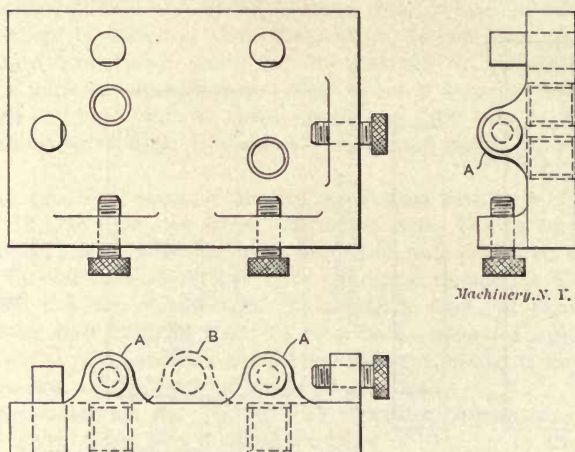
Second Improvement: Locating Screws Holding Work in Place
